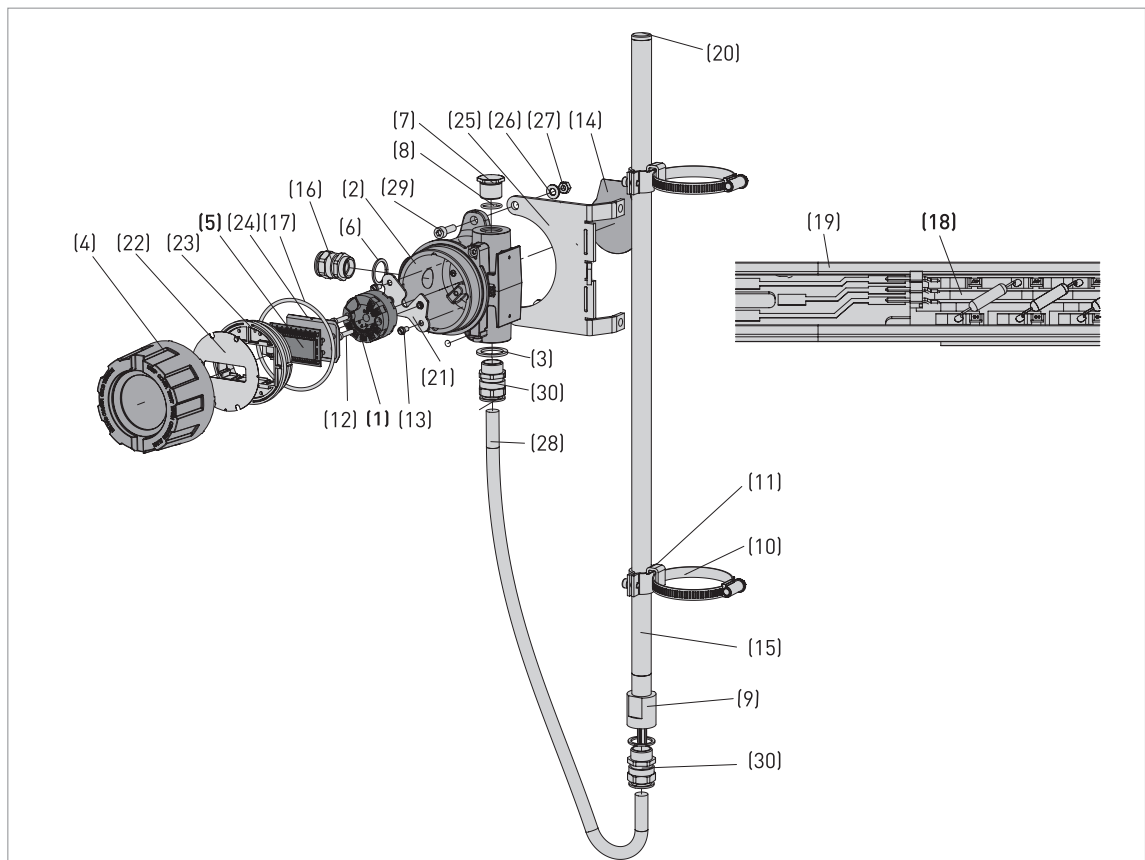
LT40 F - parts of the device (refer to "Parts list" table)
